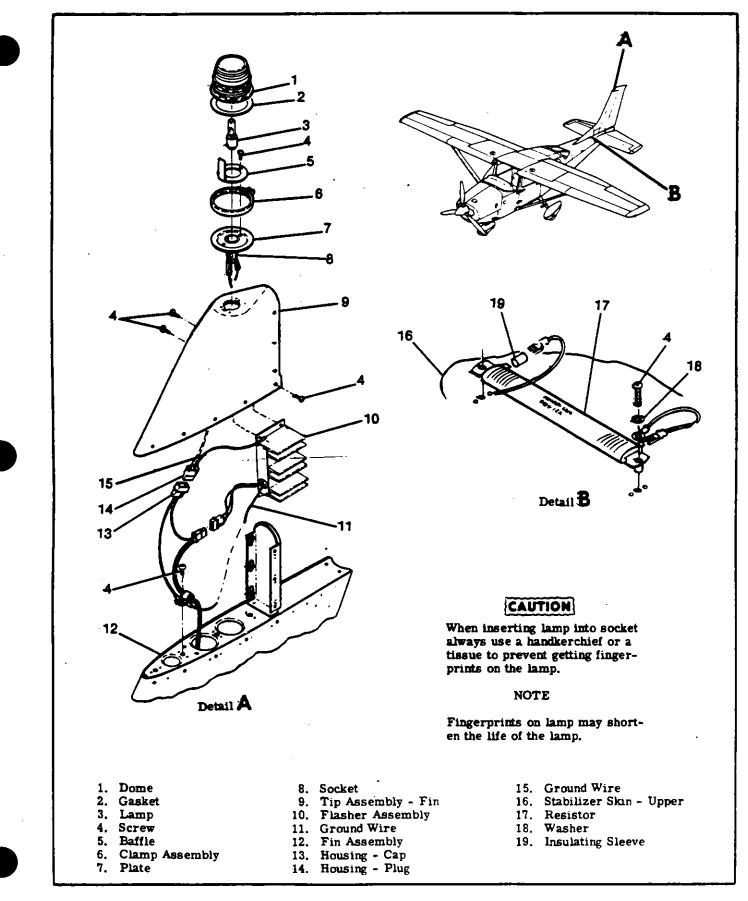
, Flashing Beacon Light Installation (Sheet 1 of 2)
